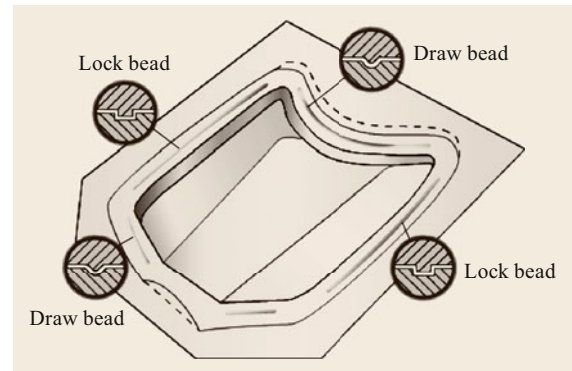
Deep drawing of complex parts using draw beads and lock beads
